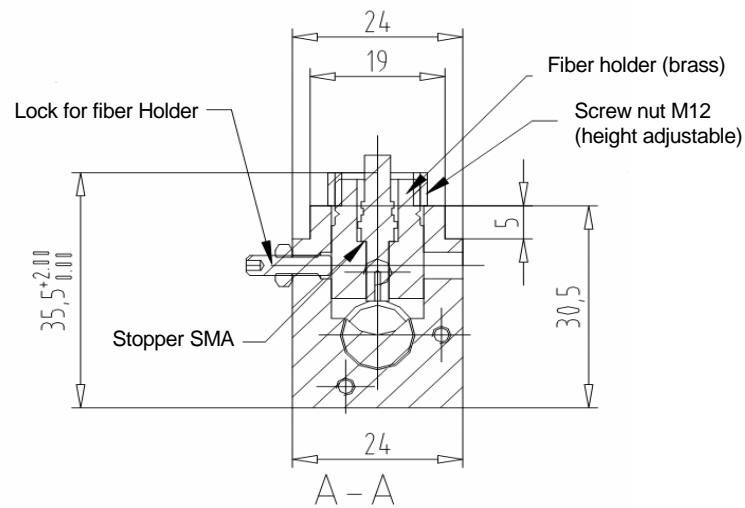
Front view of the Off Axis Parabolic Mirror housing
